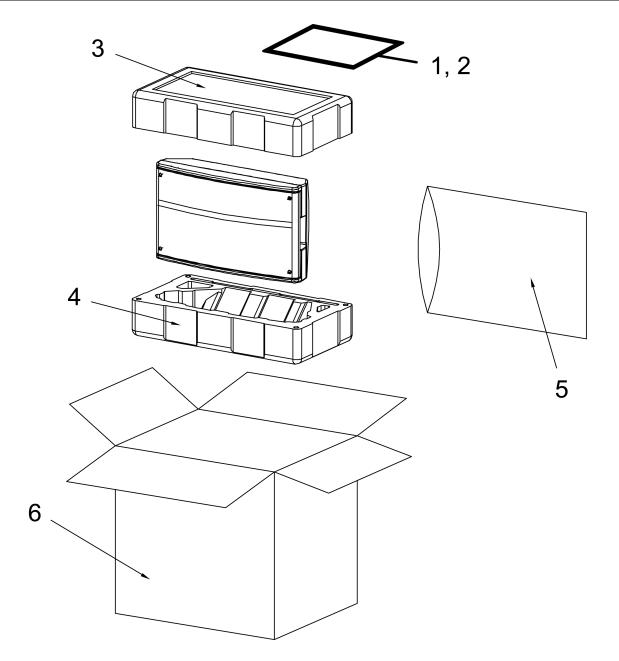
Panaray Model 620M Loudspeaker Packaging View
